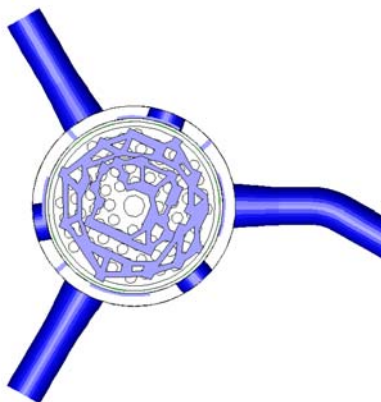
View of CAD model from below, showing the two cut-away horizontal support plates, inlet pipes, and penetrations
